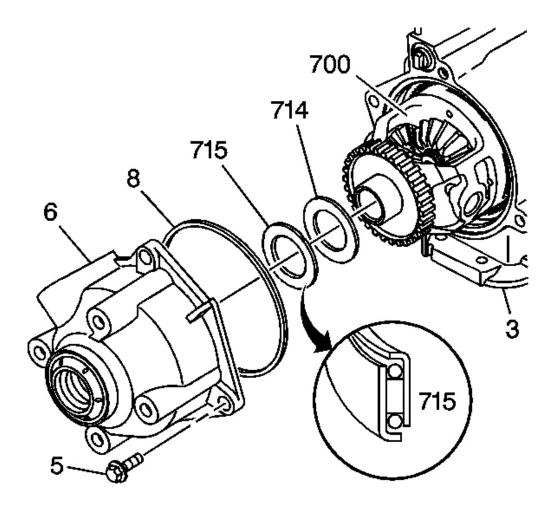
Locating Differential/Final Drive Carrier Assembly Thrust Bearing Courtesy of GENERAL MOTORS CORP.
